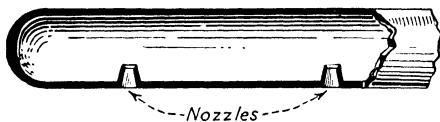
Soot-blower element of extra-heavy wrought seamless steel tubing.
